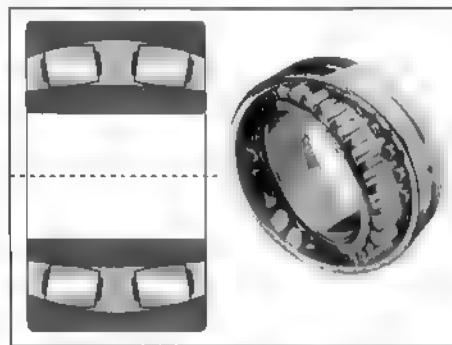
Left, cross-section through a self-aligning roller bearing; right, view of a self-aligning roller bearing. Photo courtesy the Timken Company.
